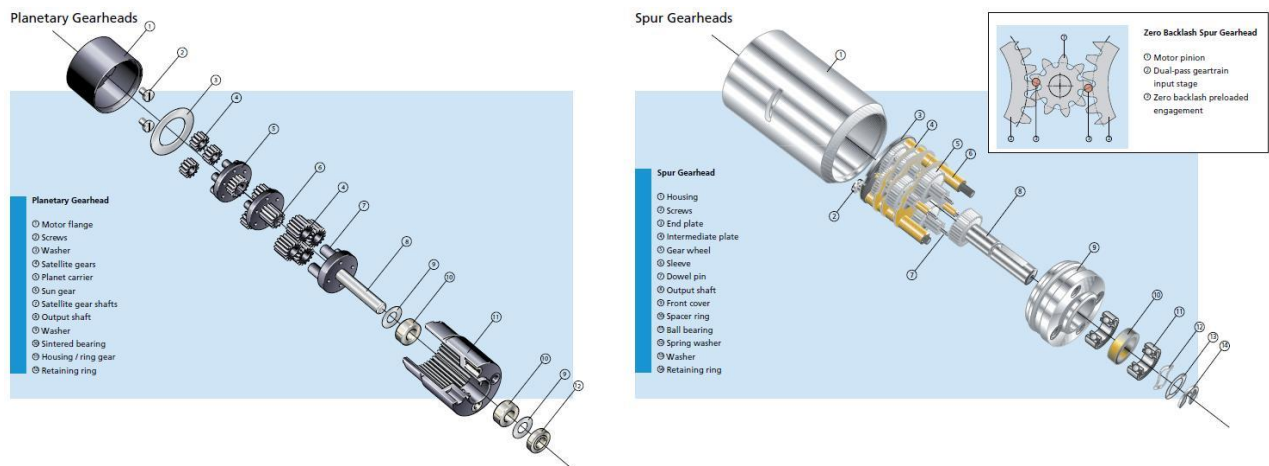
Planetary (left) and spur (right) gearheads technologies with an inlet on zero backlash principle.
